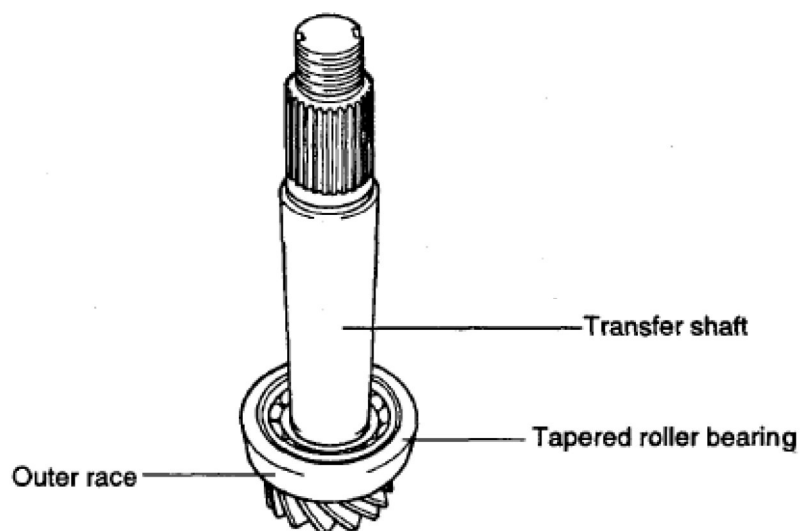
Pressing Tapered Roller Bearing Onto Transfer Driven Gear
